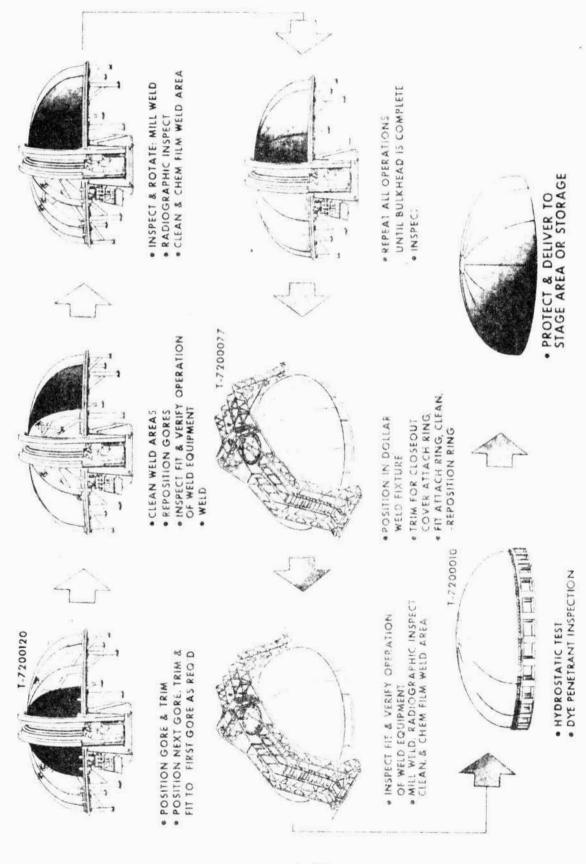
Forward LH2 Bulkhead Fabrication Sequence
